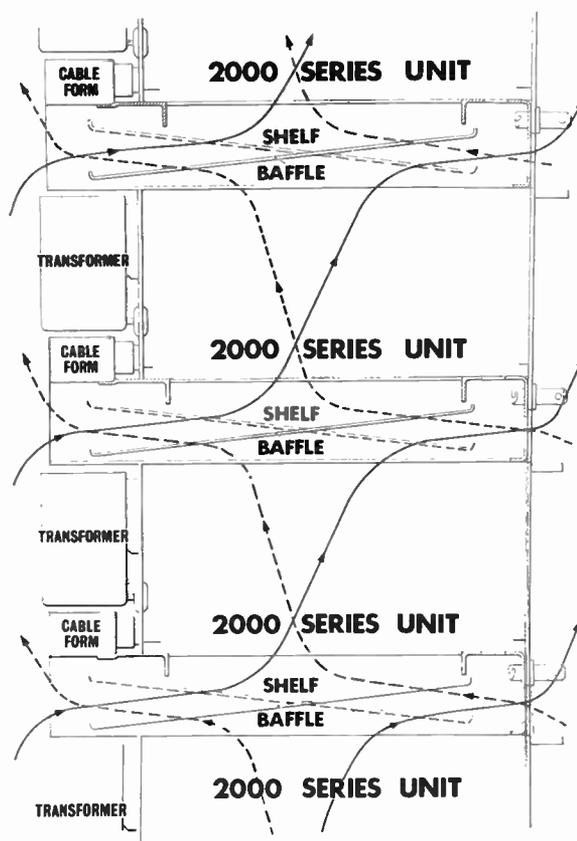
Sectional view of shelf assembly demonstrating ventilation.
